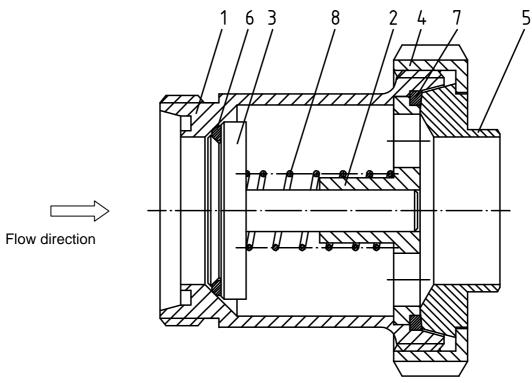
Sectional view of non-return valve DIN GS (dimensions see chapter 10.1)
